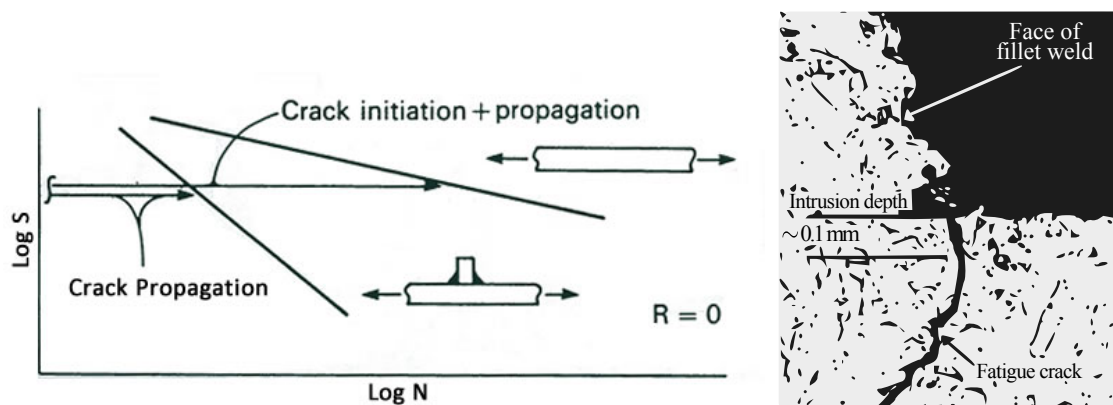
The most common defects and cracks in welded details, after [18]
